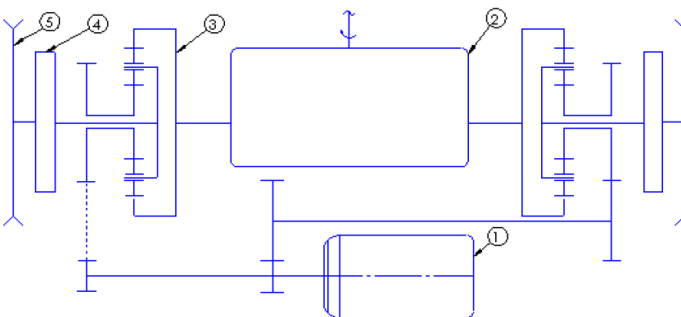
Kinematic diagram of transmission with one electric motor and counter-rotation of the sun gears of the summing planetary gear sets: 1 – electric motor; 2 – gearbox; 3 – summing planetary gear sets; 4 – final drives; 5 – driving wheels
